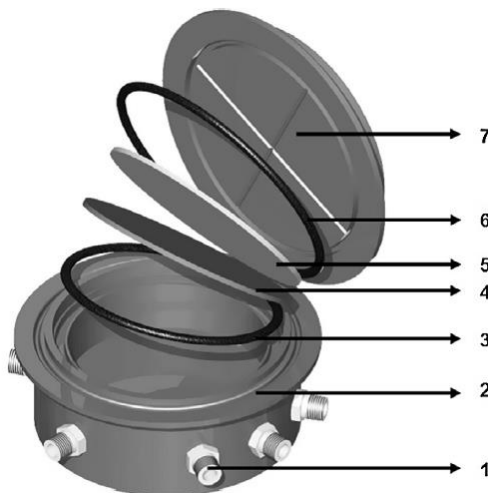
Layout of the membrane separator cell (m-CSTR). Legend: 1 – Inlet/outlet ports; 2 – Feed/retentate chamber; 3 – Inner o-ring; 4 – Membrane; 5 – Sintered plate; 6 – Outer o-ring; 7 – Cover. (Adapted from Peeva and Livingston, 2013).
